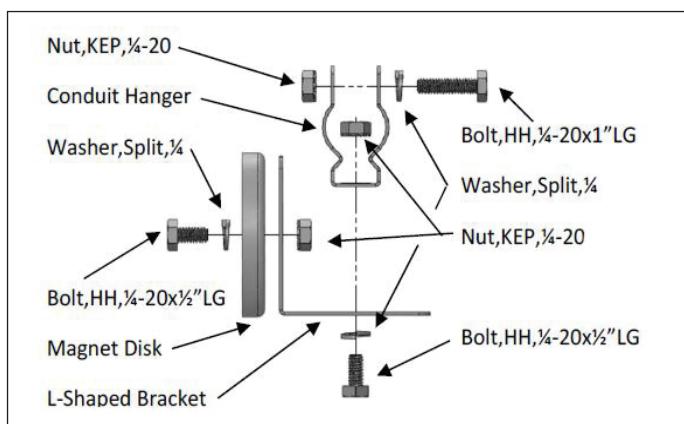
EMT Conduit Bracket Assembly (EXPLODED VIEW)
